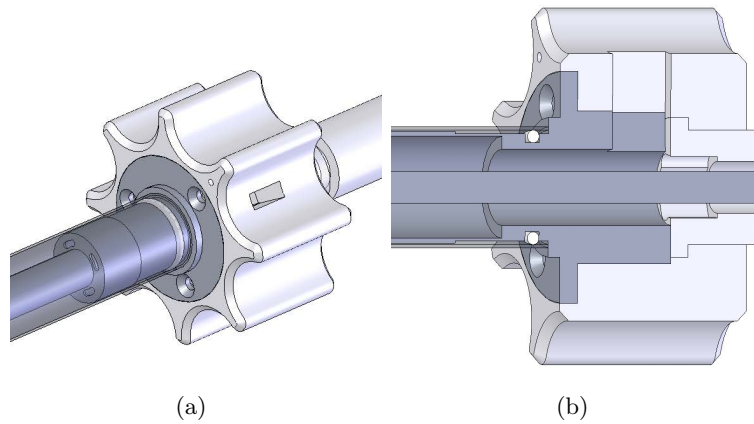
Outer view of opening for cables (a) and inner view of space available for cables (b).
